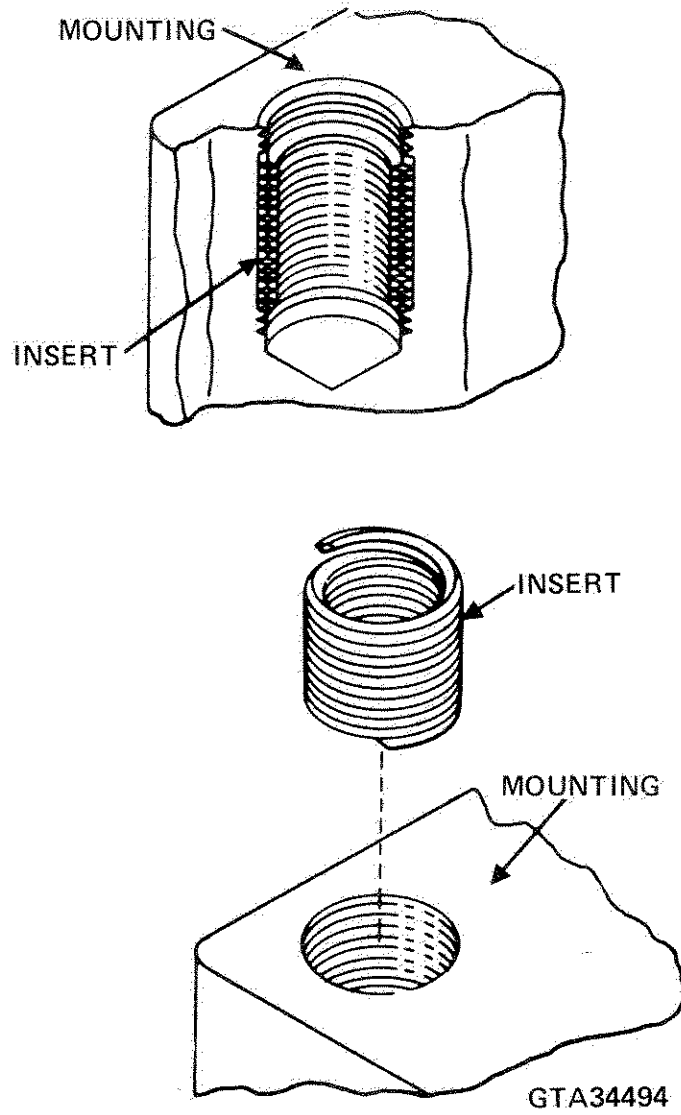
Helical (Heli-Coil) Screw Thread Insert
